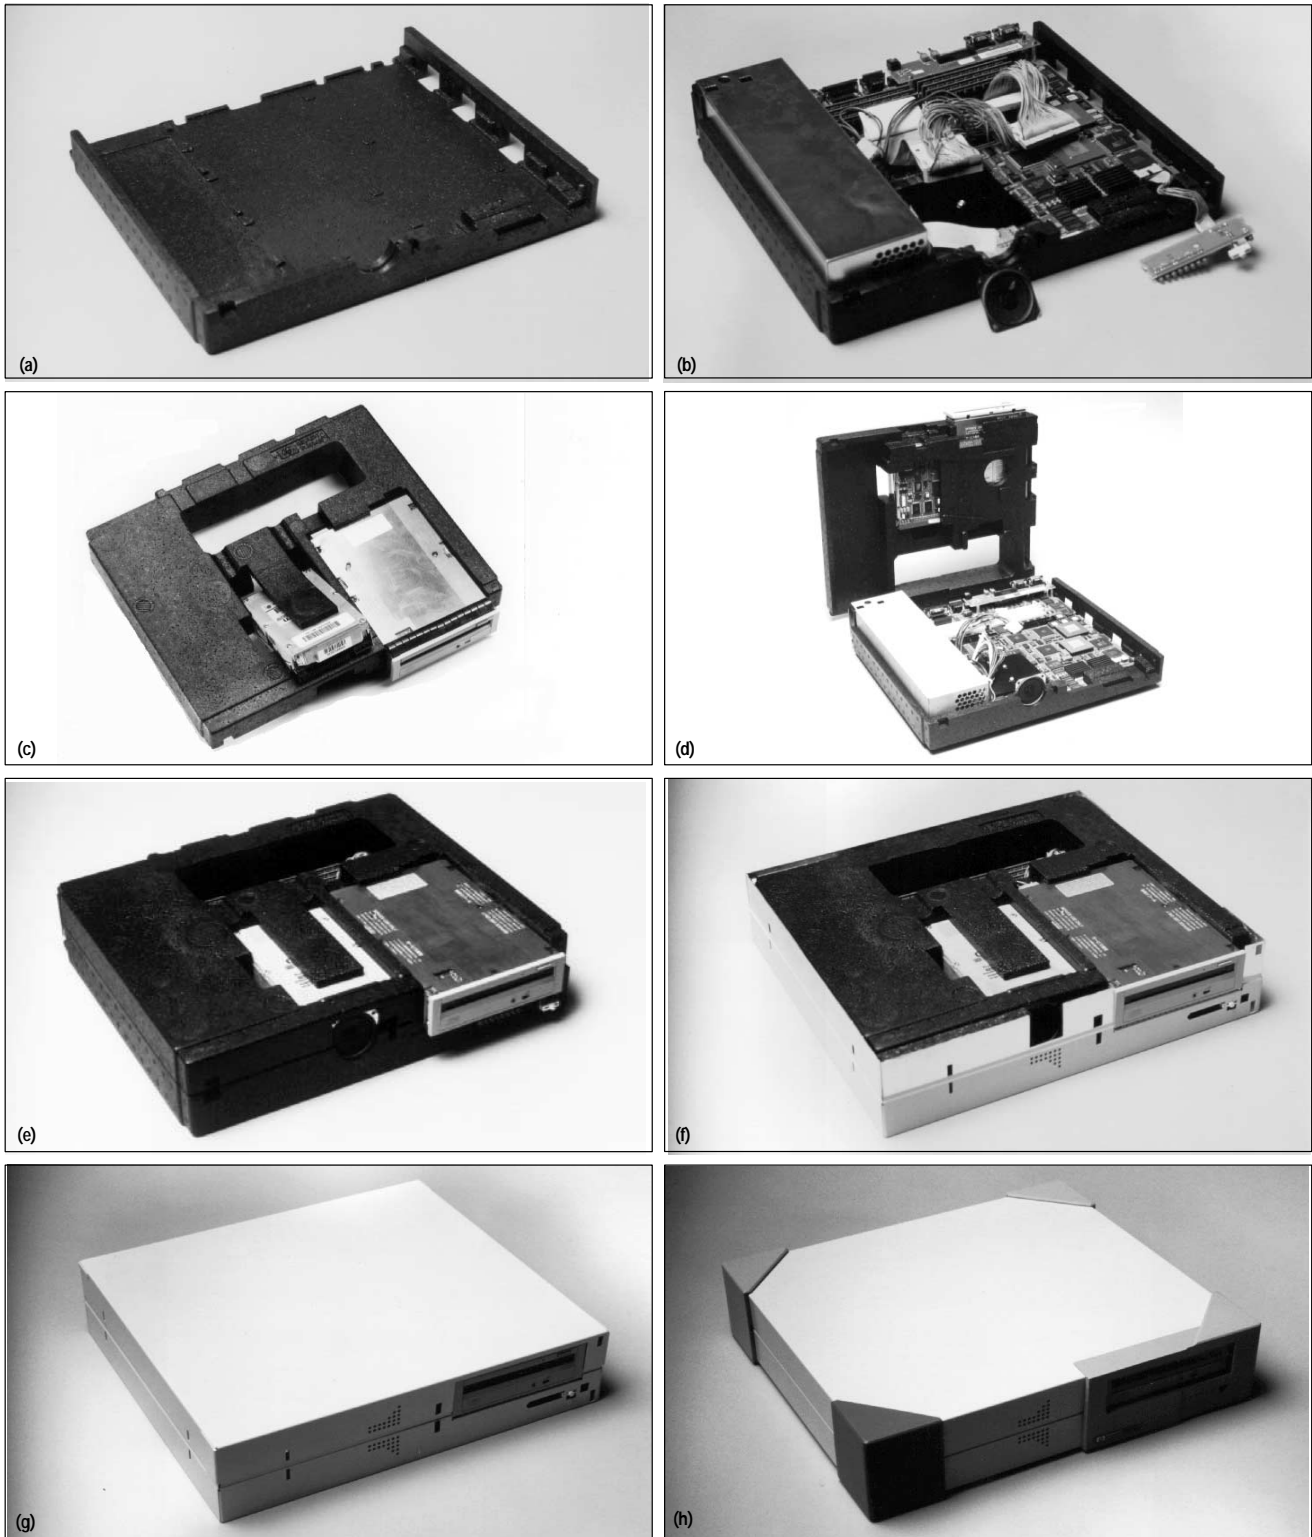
HP-PAC workstation assembly sequence. (a) Foam bottom chassis. (b) Loaded bottom chassis. (c) Partially loaded foam top chassis. (d) Open loaded chassis. (e) Assembled loaded chassis. (f) Lower enclosure added. (g) Upper enclosure added. (h) Enclosure completed.
